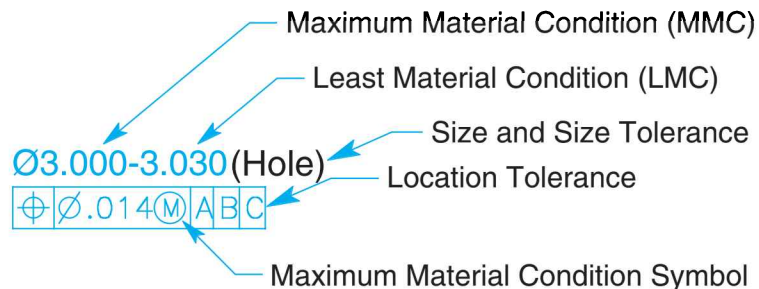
The size, size tolerance, and feature control frame for the hole in Fig. 1-2.
